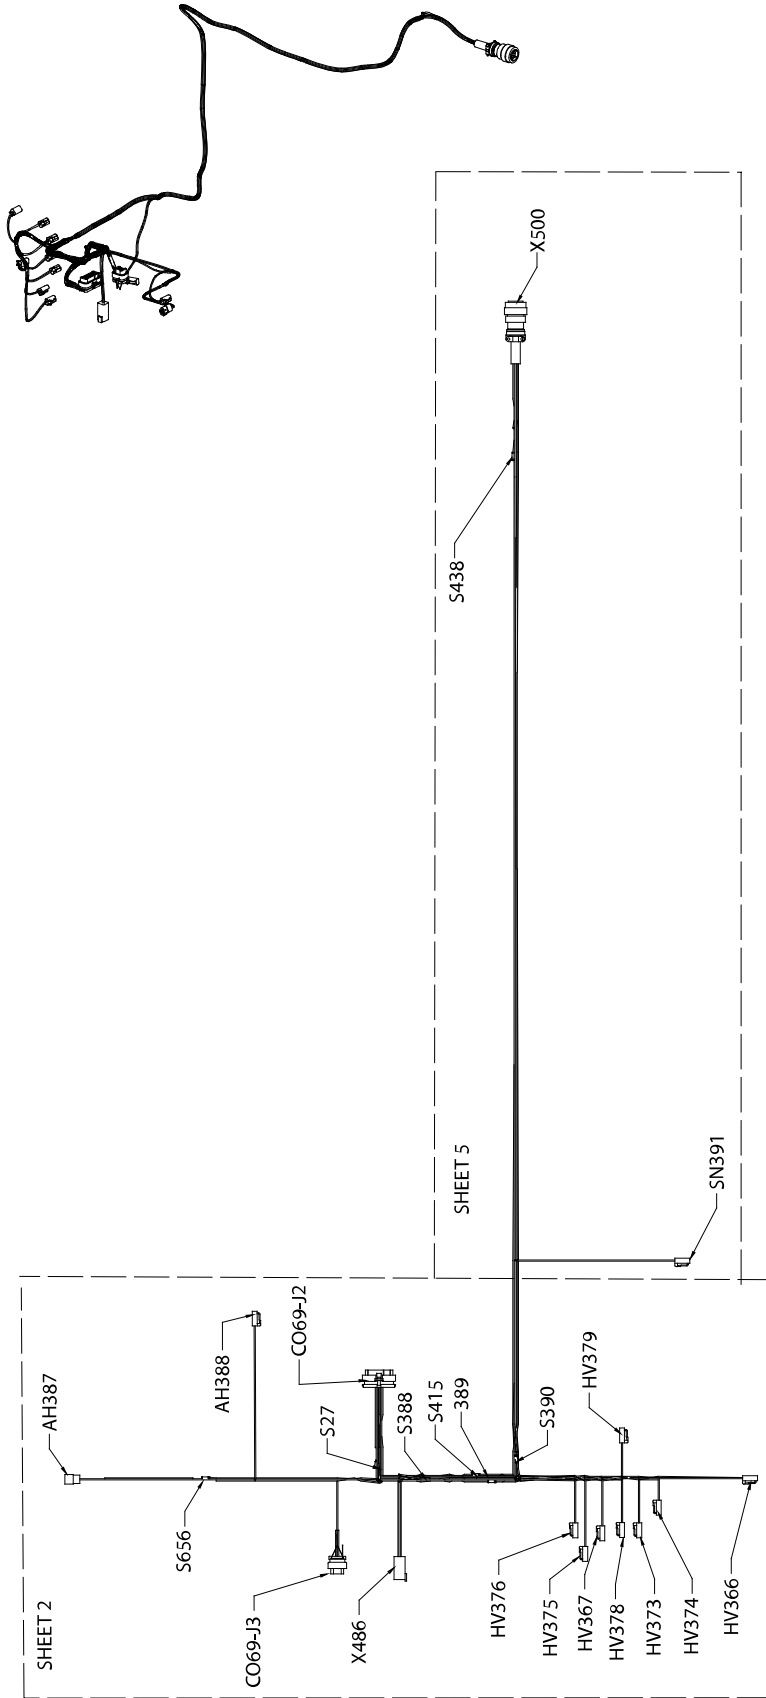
Chassis Solenoid Harness - Sheet 3 of 3
